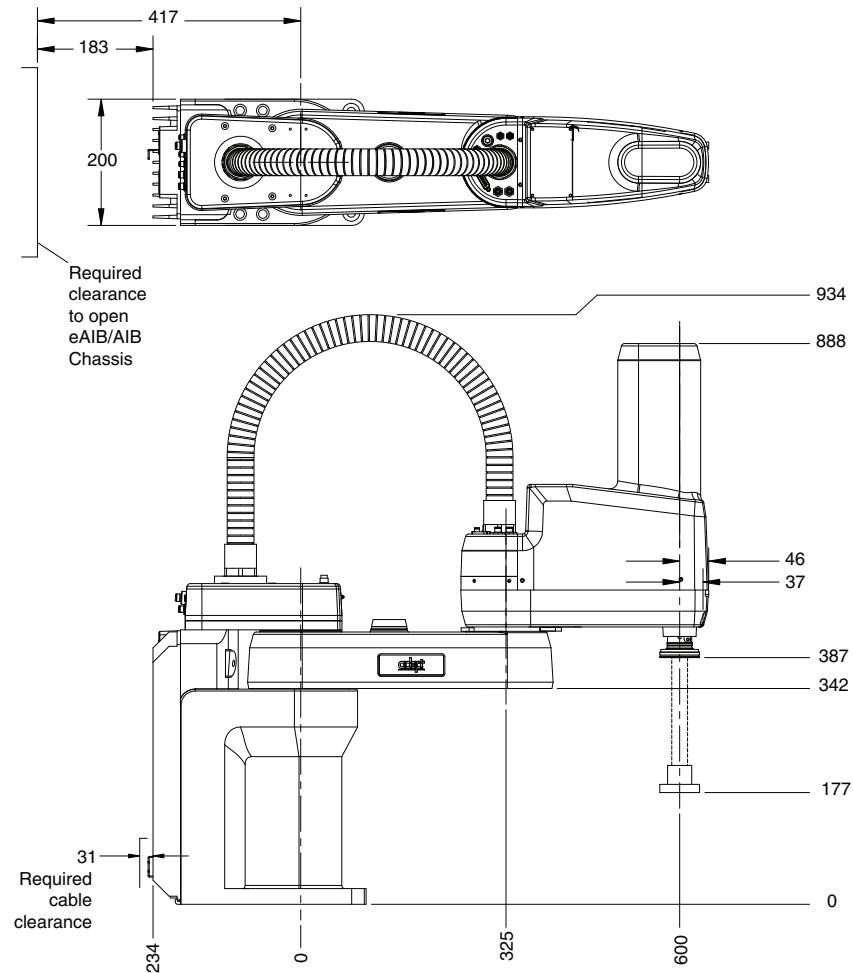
Adept Cobra s600 Robot Top and Side Dimensions
